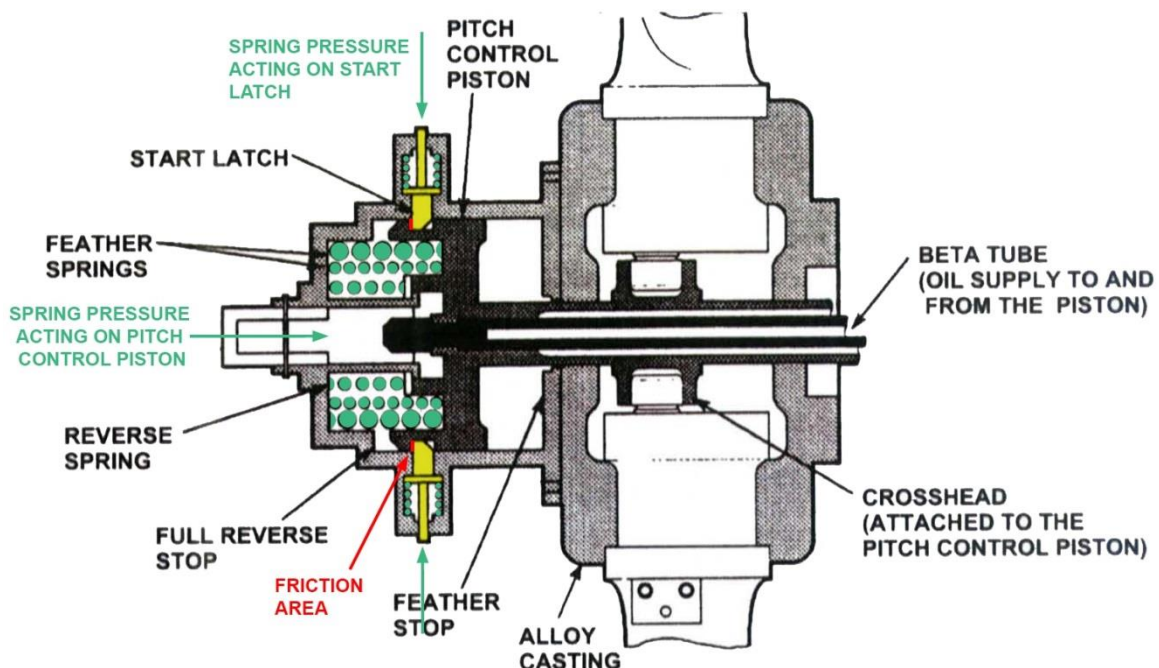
Single-acting pitch change mechanism with start lock system engaged on the start latches
